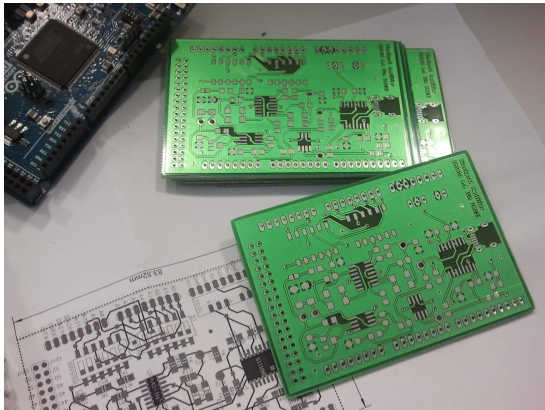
Bare, drilled PCB of the bio-signal shield.
